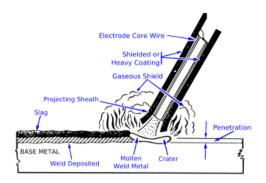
Shielded Metal Arc Welding Diagram
